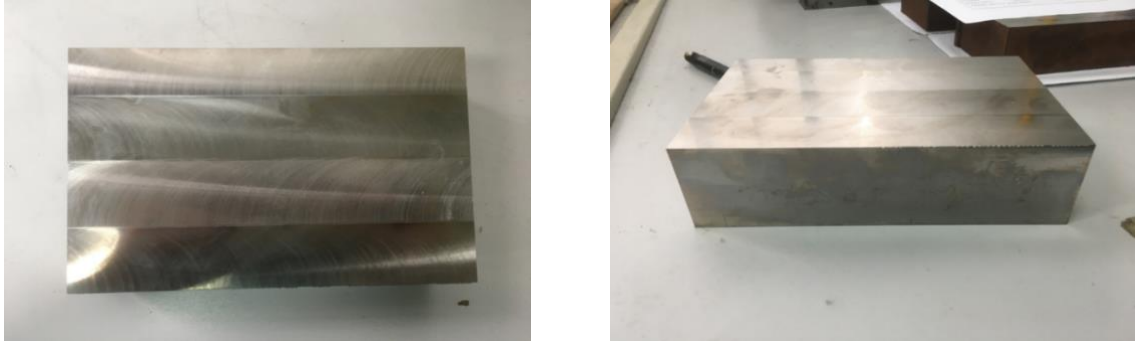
The workpiece dimension (160 mm × 110 mm × 42 mm).
